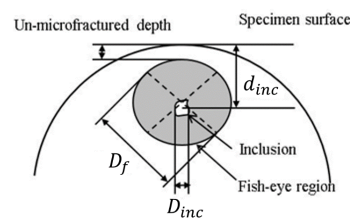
Definitions of fracture surface geometrical parameter. This illustrates typical fracture pattern observed in the fracture surface of fatigued spring steel.
